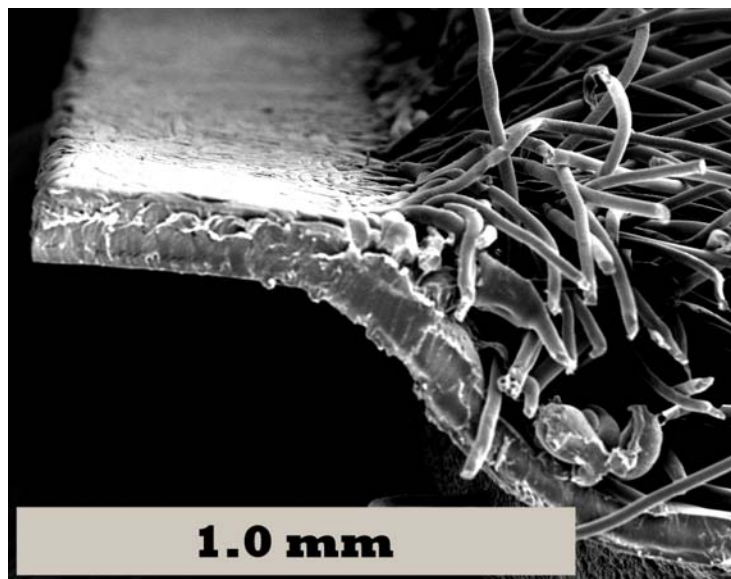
The distortion of the plate due to the ultrasonic welding
